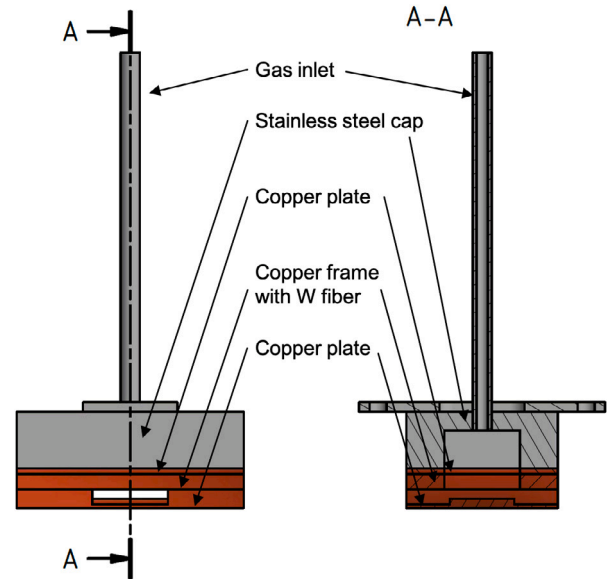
Technical drawing of the set up for the fabrication of the single fibre composites.
